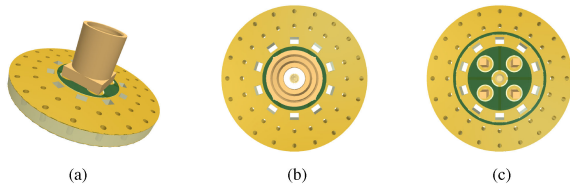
Surface mount coaxial shunt resistor PCB design #1. (a) Orthogonal view. (b) Top view. (c) Bottom view.
